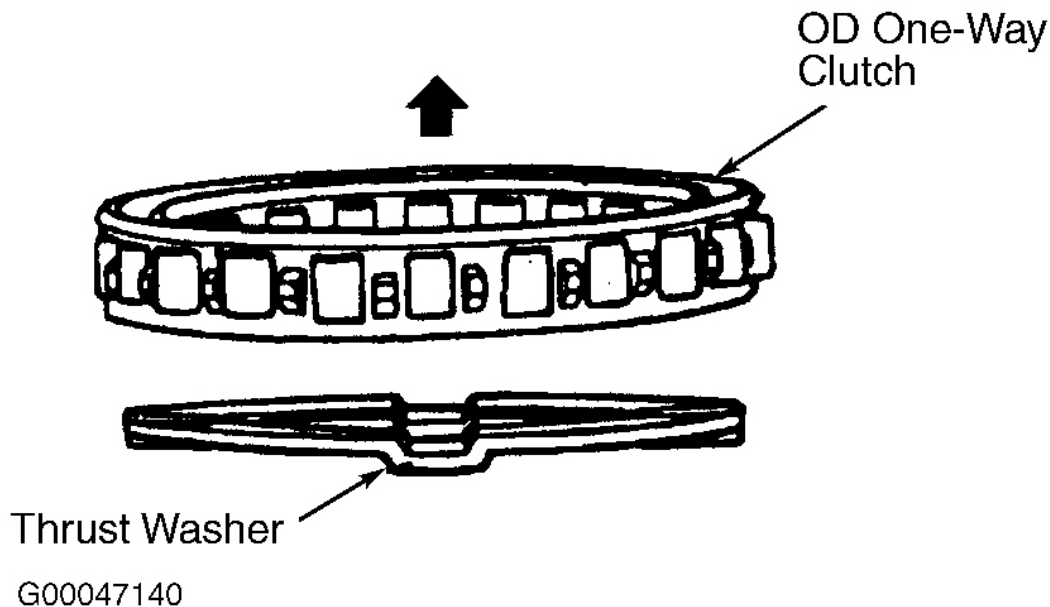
Locating OD One-Way Clutch & Thrust Washer
